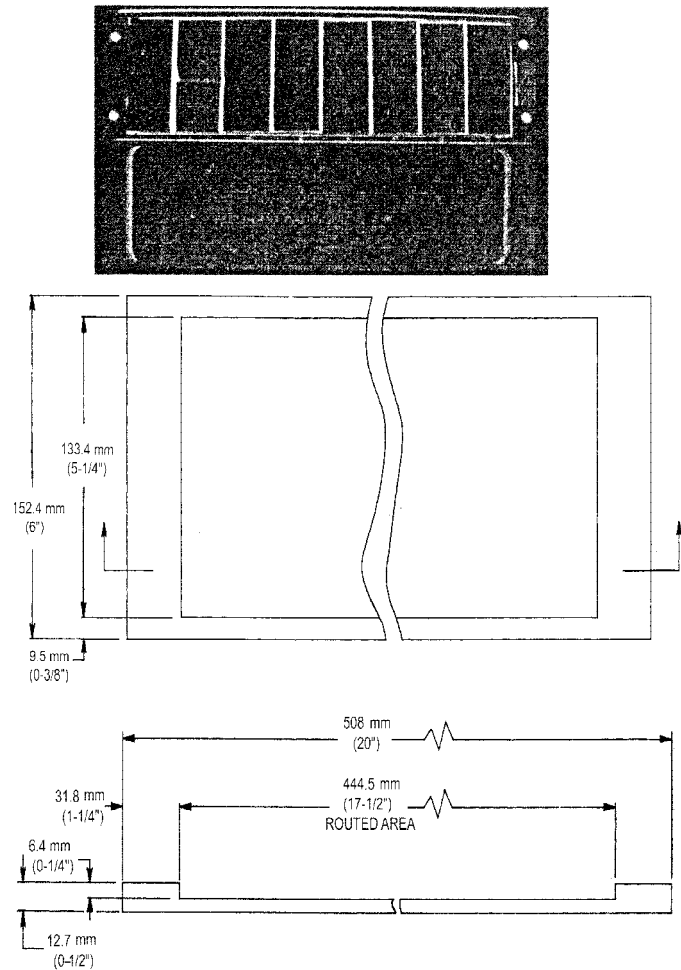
Routed Specimen Mounting Board Showing Placement of Specimens
